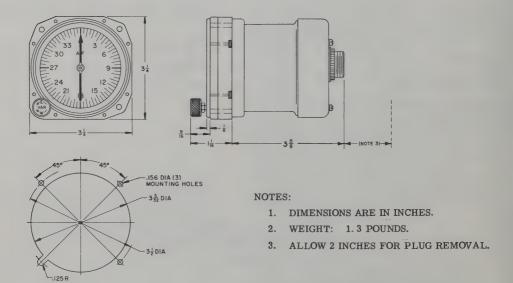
IN-12-1 and IN-13A Indicator, Installation Dimensions
